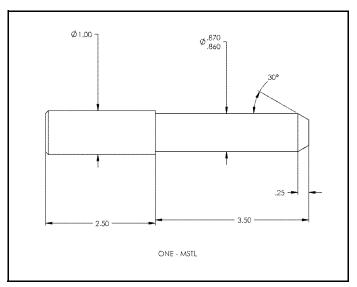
Drift Pin for Lining Up Thrust Washers with Output Planet Gear
